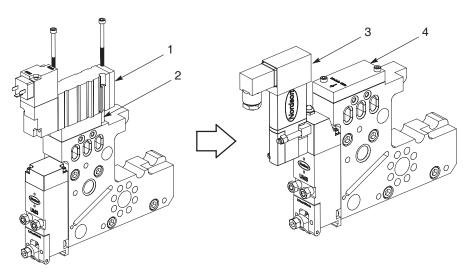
Converting from a manifold-mounted solenoid valve to a flange-mounted solenoid valve
